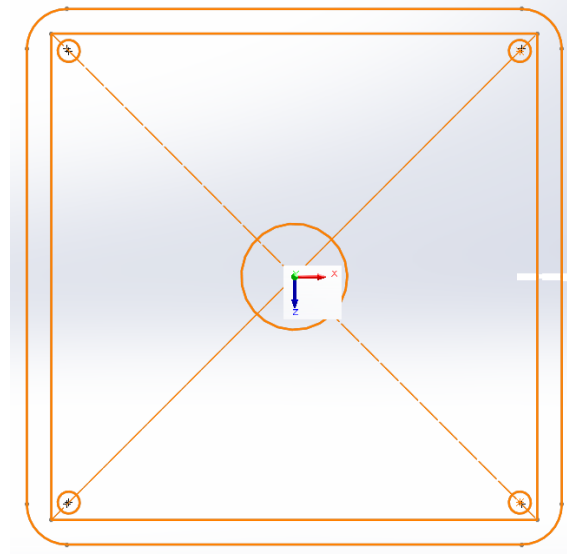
Foundation-beam Layout, 659.75[in] - Square
